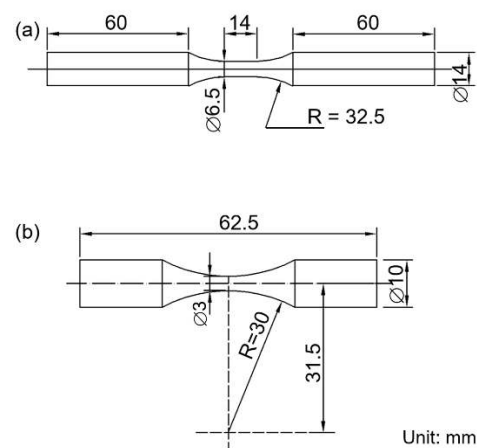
Specimen geometry and dimensions for: (a) HCF and VHCF test; (b) LCF test.
